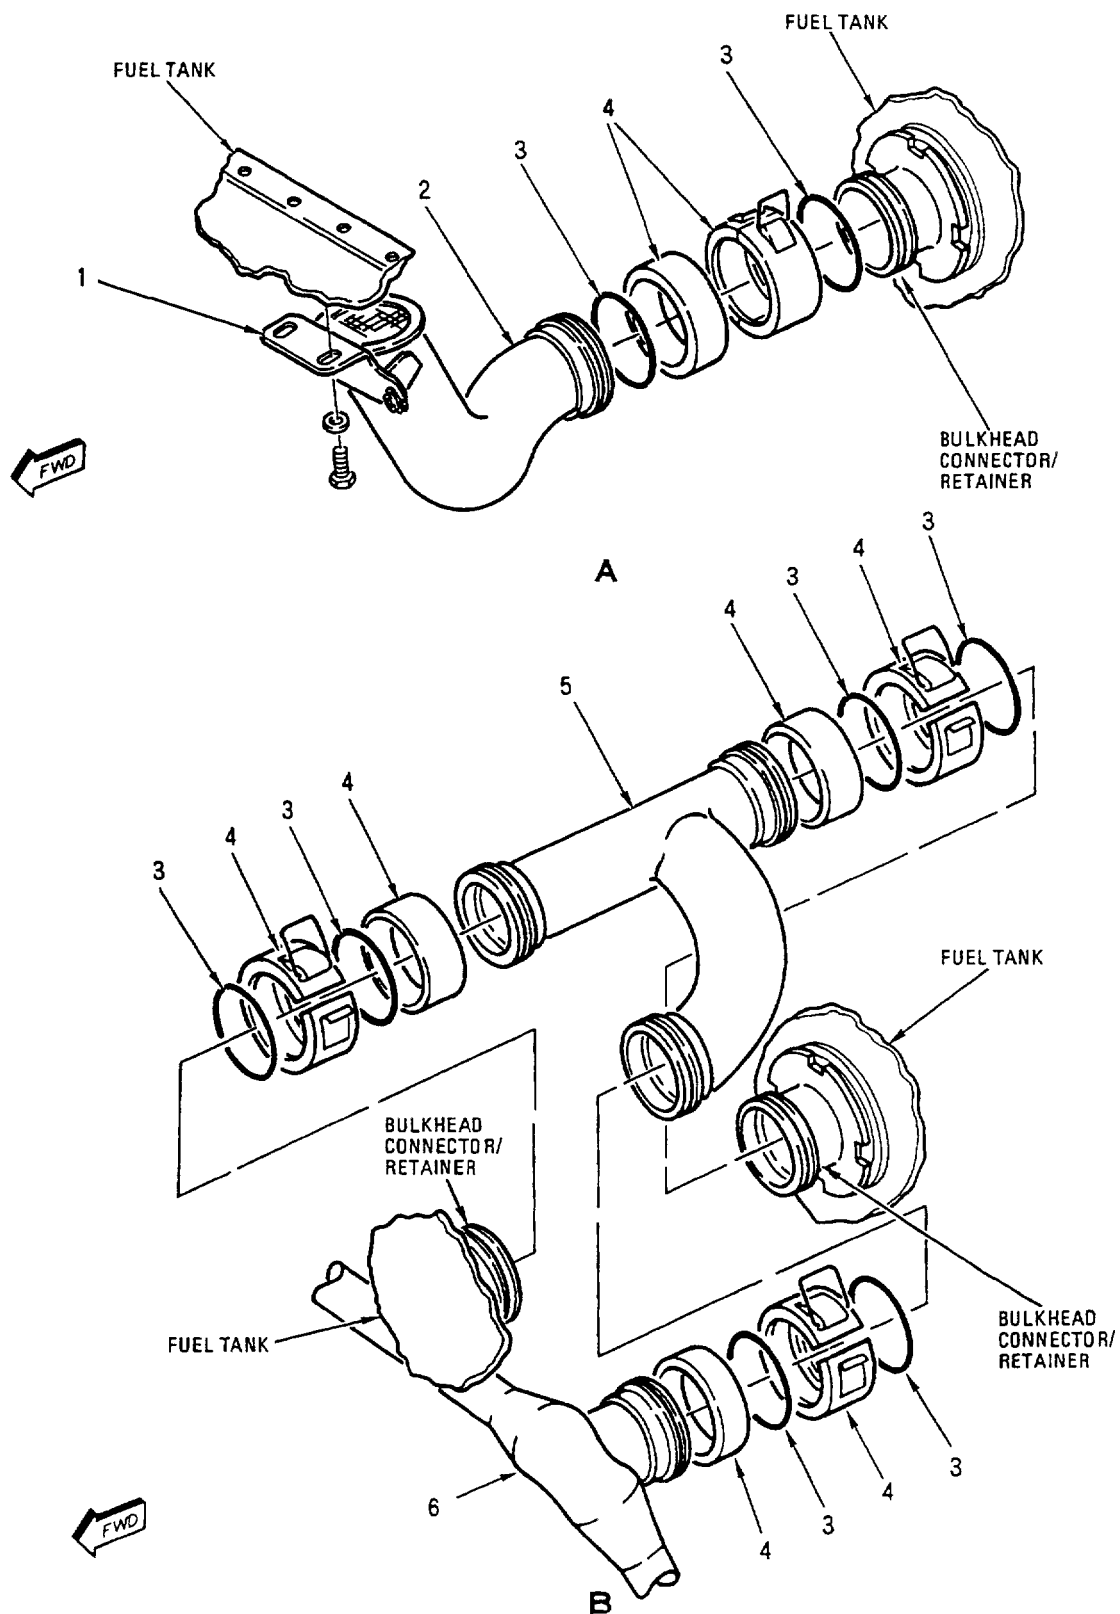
No. 4 Fuel Tank Refuel/Transfer Check Valve (5VAP557) (Sheet 3)
